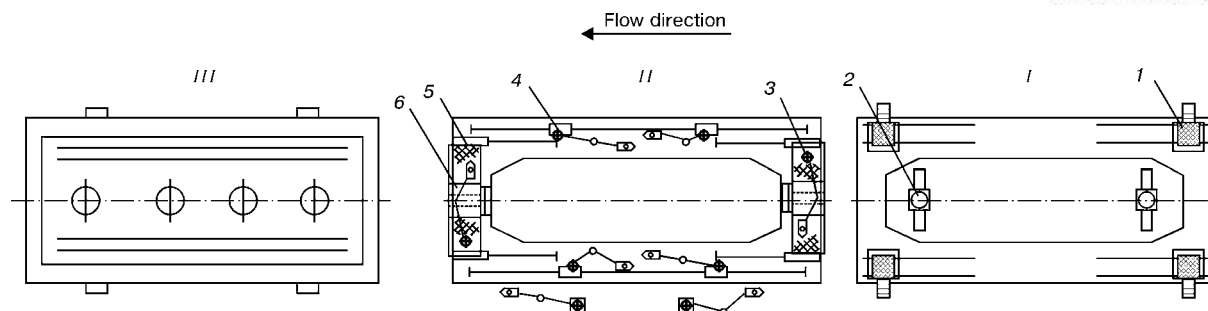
Schematic of equipment layout in the section of assembly of the car metal structure (for designations see the text)
